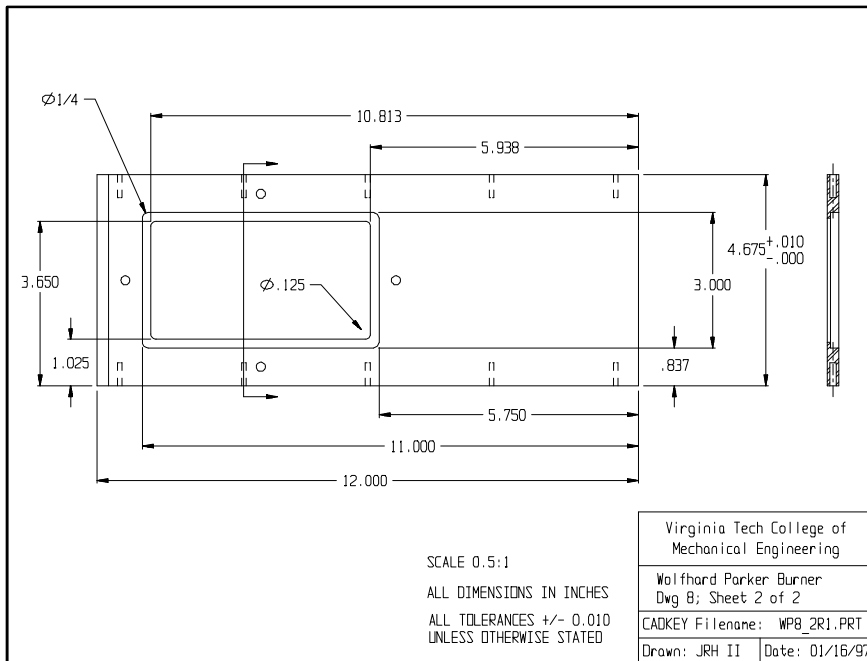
Burner Surround East and West Walls, Drawing 8 Sheet 2 of 2
